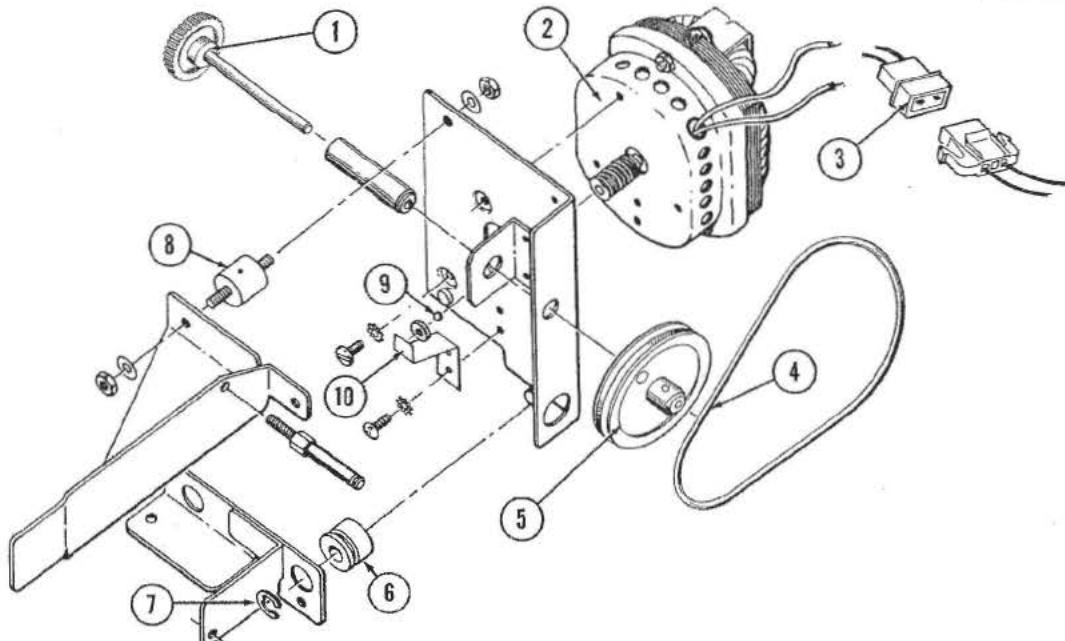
TURNTABLE MOTOR AND GEAR SHAFT ASSEMBLY
